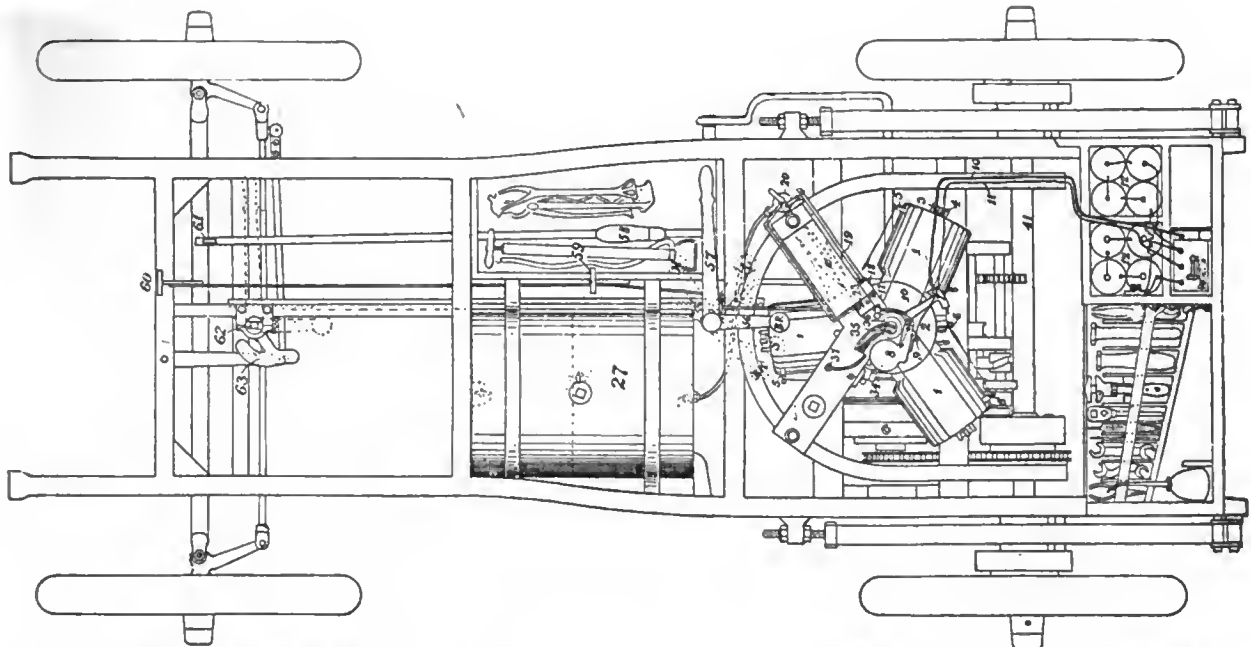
CHASSIS OF ADAMS-FARWELL CAR, SHOWING HORIZONTAL DISPOSITION OF ROTATING MOTOR UNDER REAR SEAT.
